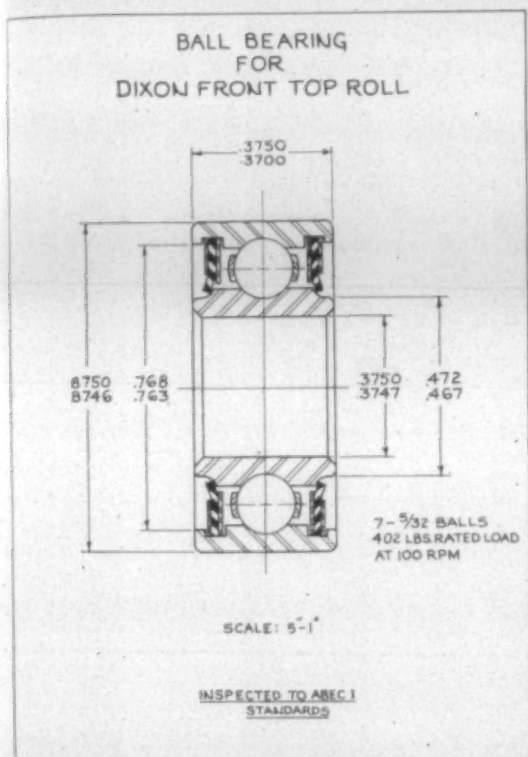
The number of bearings are not indicative of roll life. The large single Dixon front roll bearing is held to a run-out tolerance of 0.0003 inches. The maximum total mathematical run-out of this construction is 0.0006 inches.
